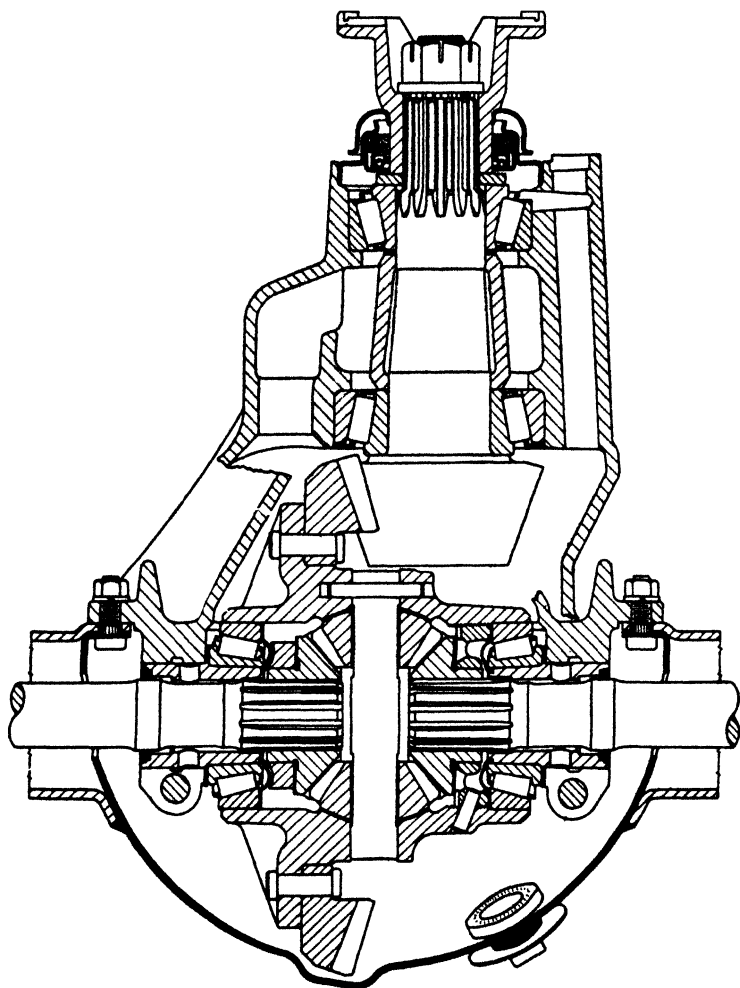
AXLE HOUSING REINFORCED BY WELDED-ON COVER PLATE (CADILLAC).
